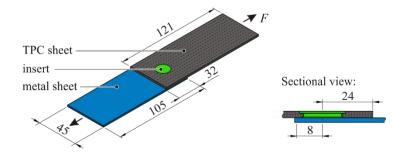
Specification and dimensions of the single-lap shear tests specimens (all dimensions in mm).
